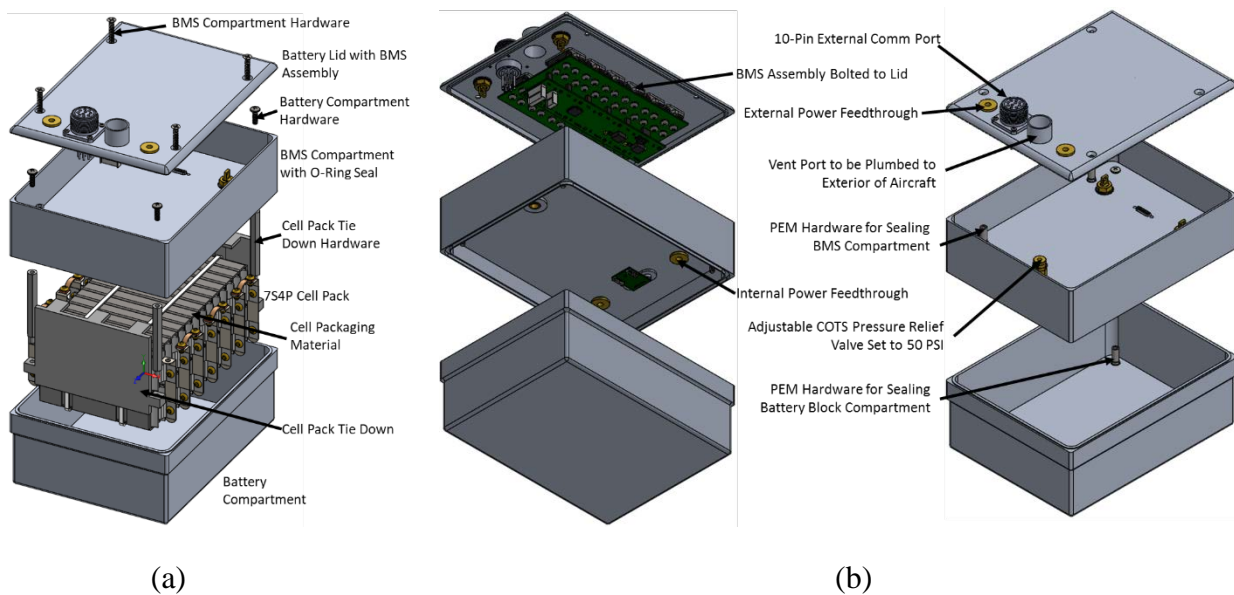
26 V, 20 Ah Li-ion aircraft starter battery, the demonstration platform of this program incorporating the packaging technology: (a) exploded view, (b) box assembly detail view
